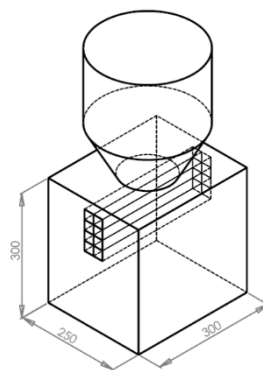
Schematic showing casting positions where specimens were taken. Dimensions in mm.
